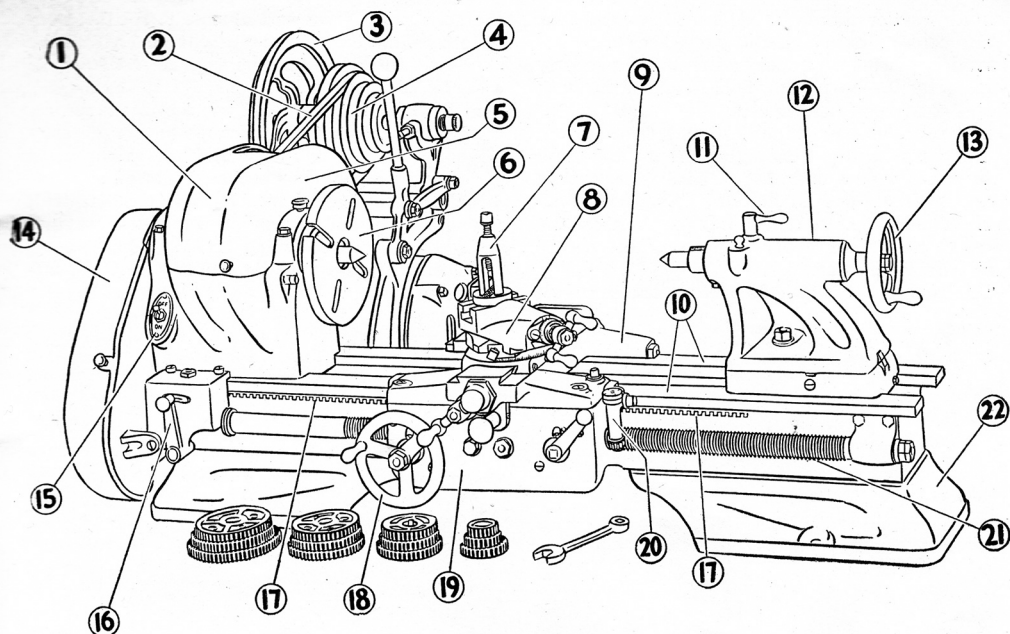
A BENCH TYPE BACK-GEARED ENGINE LATHE
